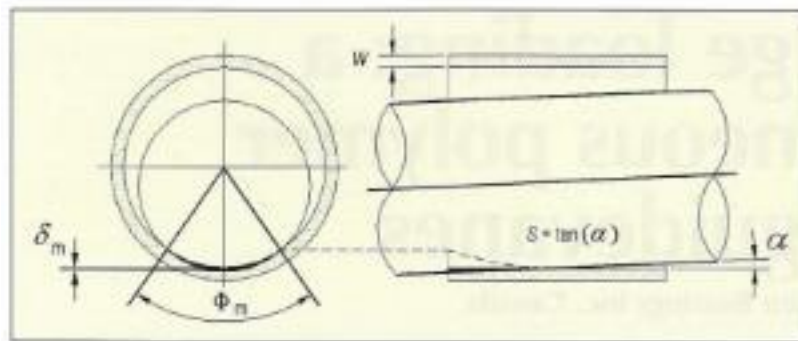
Illustration of shaft and bearing under edge-loading (Ren & Muschta 2010)
